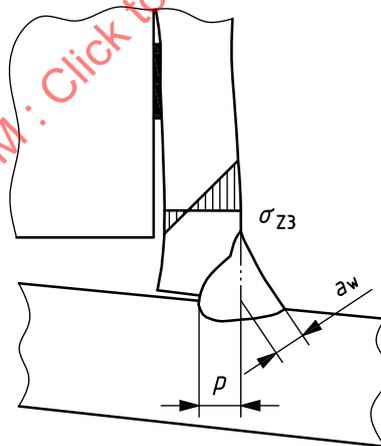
Symbols used in calculation of fillet weld
